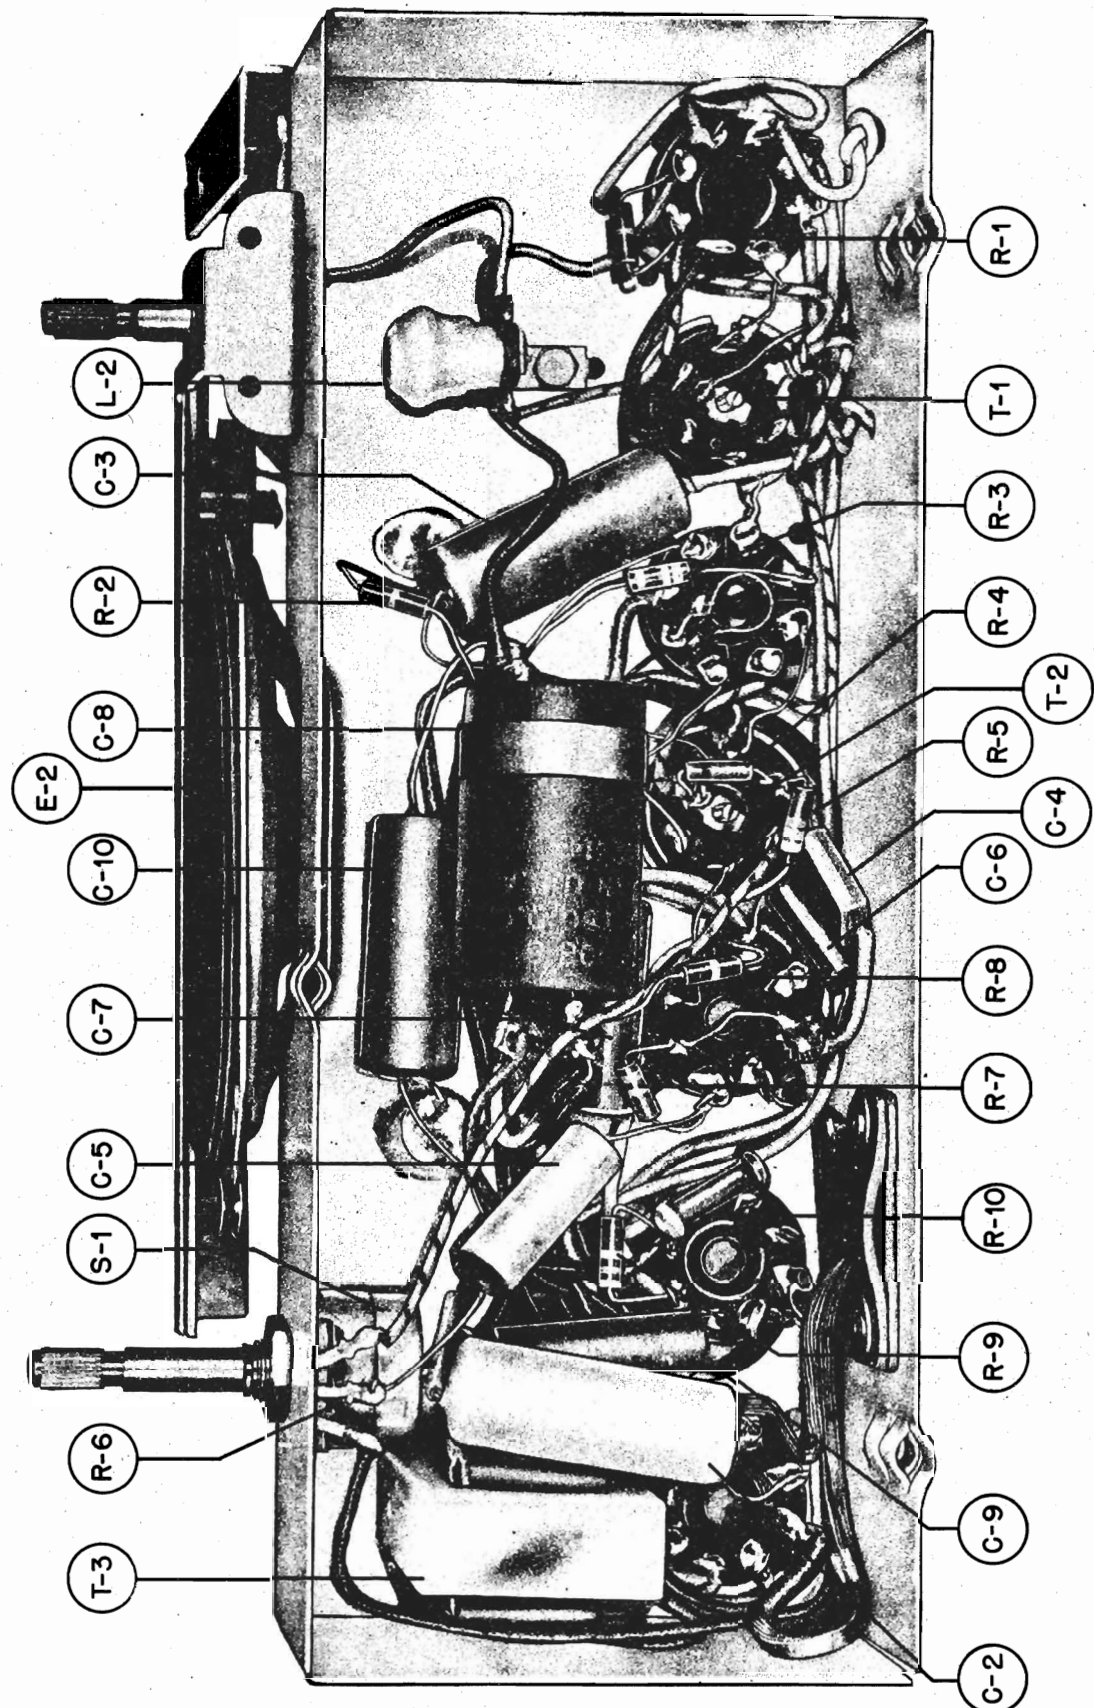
BOTTOM VIEW (CHASSIS HS-50)
